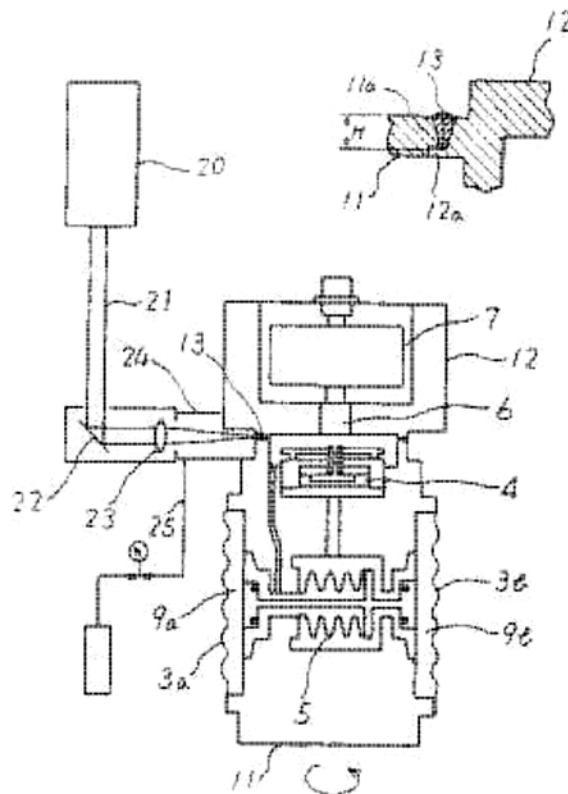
Laser welding apparatus to weld the components of a differential pressure transmitter
